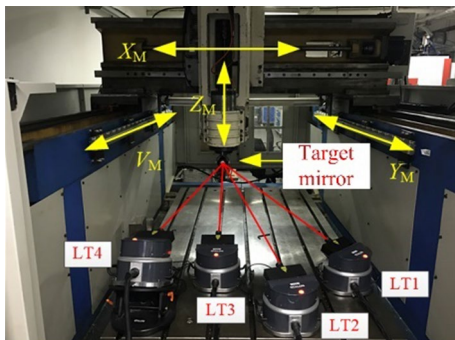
Three-axis gantry-type numerical control milling machine geometric error measurement
